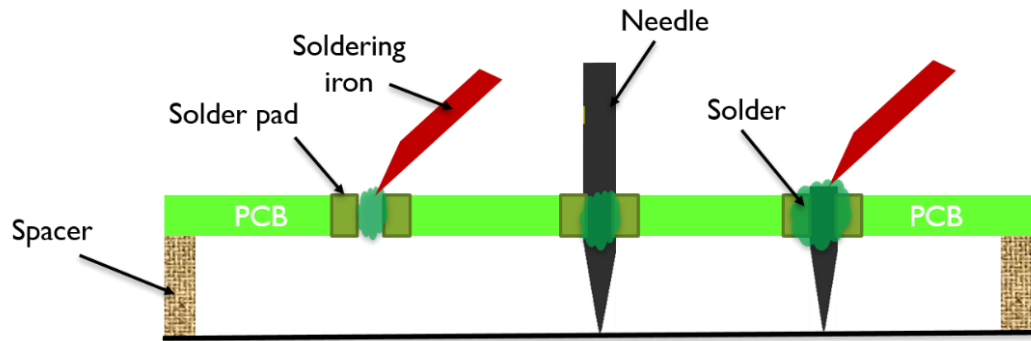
Needle assembly procedure of the 1st gen. EP chip. Electrode holders are filled with solder and, while the solder is still warm and fluid, the needles get inserted. After the solder solidifies, the back of the needle is clipped and more solder is added for a greater electrical connection and mechanical strength.
